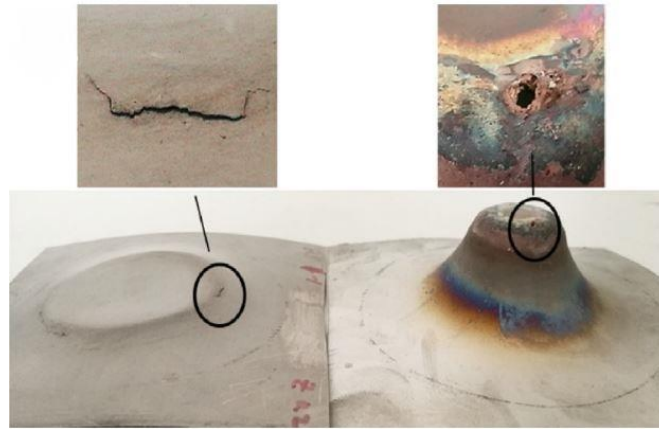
Defects on Ti-6Al-4V titanium alloy sheet due to using electric hot incremental forming [64].
